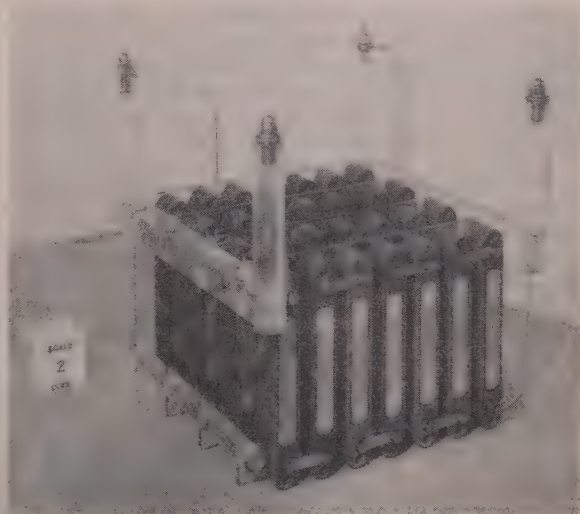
70 kV 1 amp silicon rectifier assembly.
